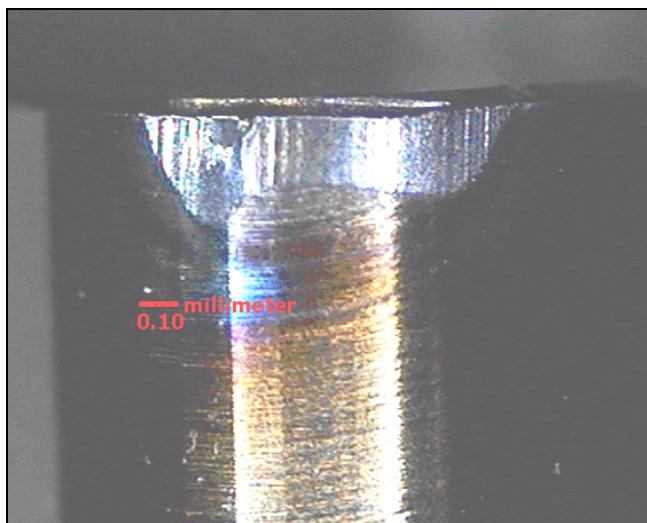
A wear pattern on worn cutting tools at the end of tool life (cutting speed = 140 m/min, feed rate = 0.06 mm/rev, depth of cut = 0.4 mm).
